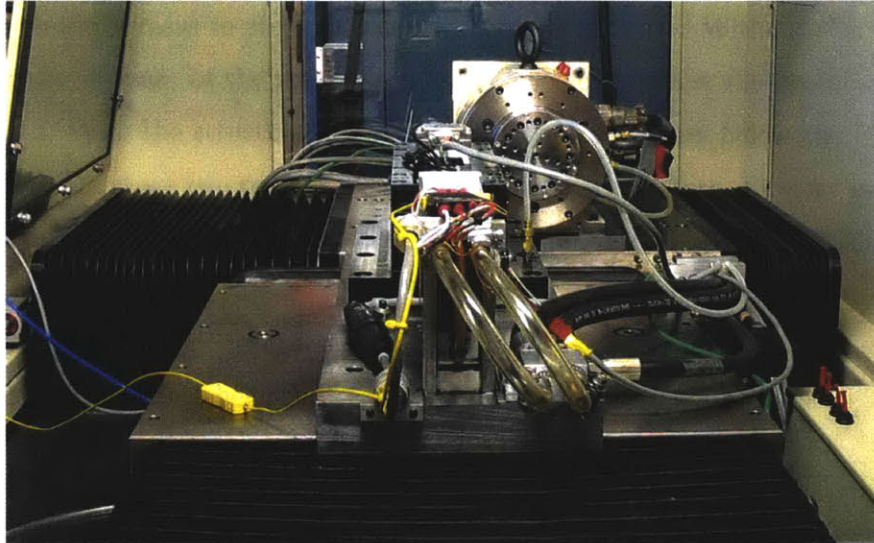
Rear view photo the prototype linear fast tool servo mounted on the Moore Nanotechnologies machine base.
